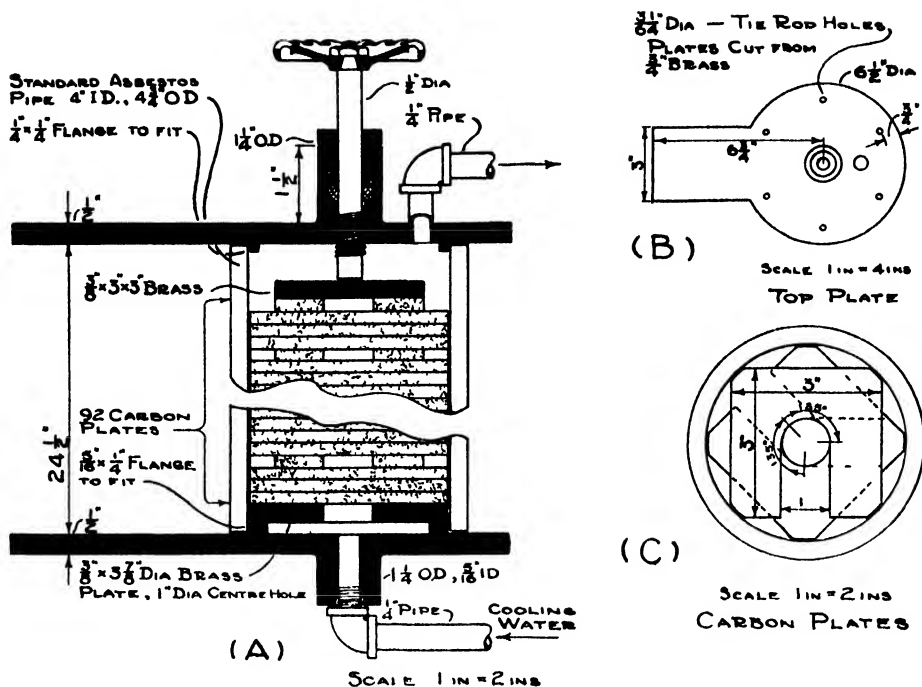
(A) Vertical section (B) Casting detail, plan (C) Arrangement of carbon plates, plan
